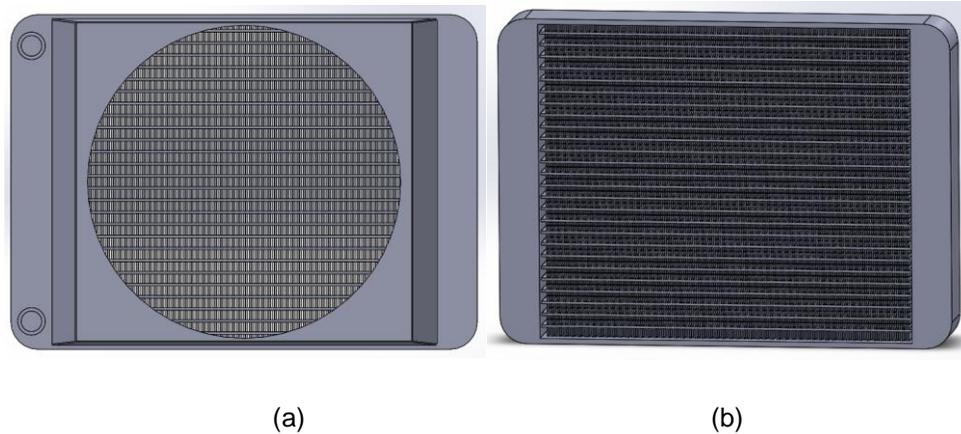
Two sides of the designed radiator (a) with shroud and (b) opposite side
